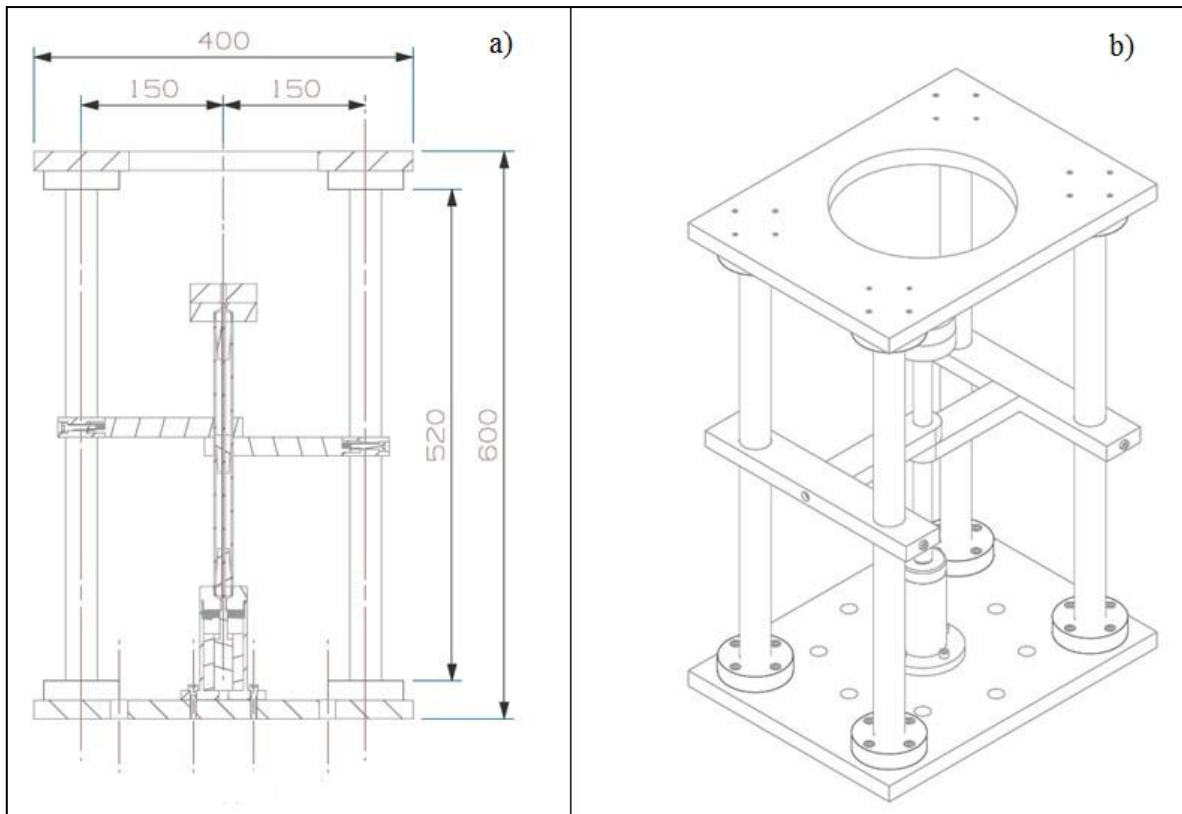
Concept-1 design: a) section-view sketch and b) 3D CAD drawing.
